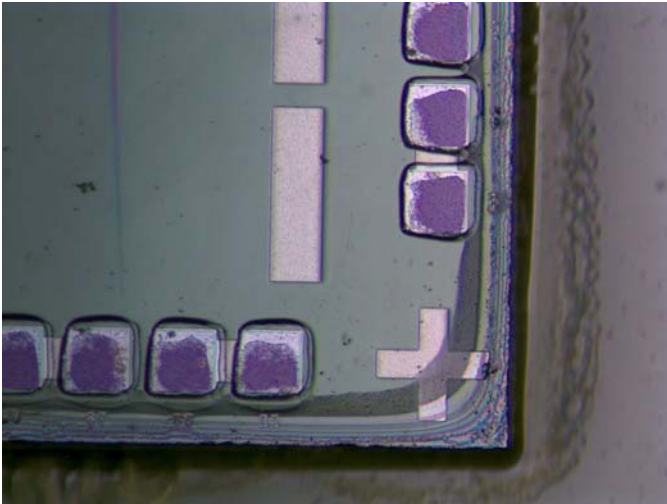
Photograph of the Pad Contact Holes in a Polyimide Coated Thinned PB6 Die.
